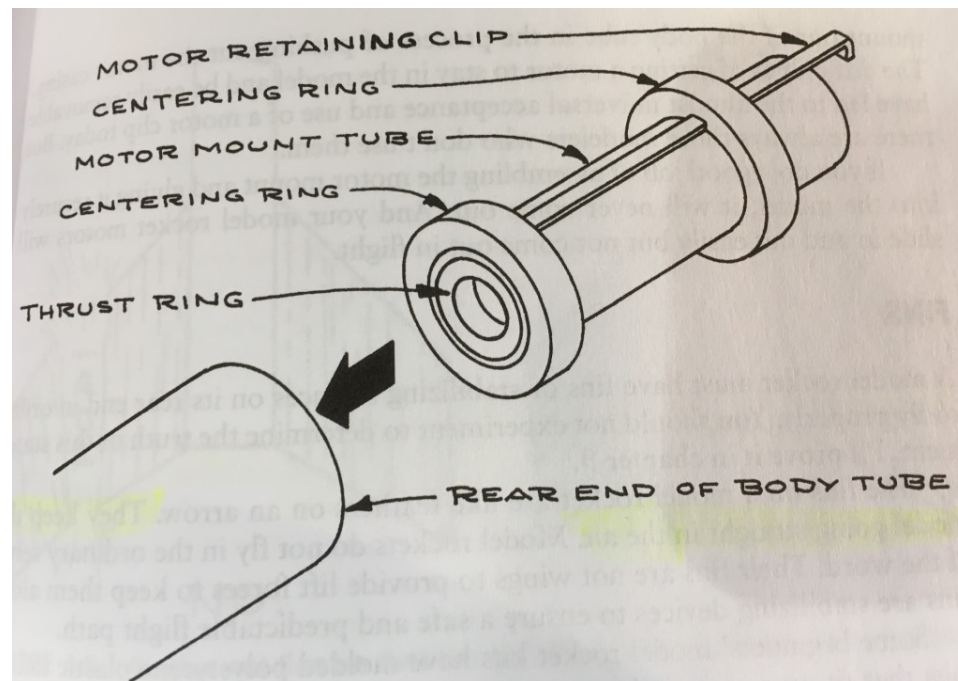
Drawing of a typical motor mount assembly. Stine (c) 2004.
